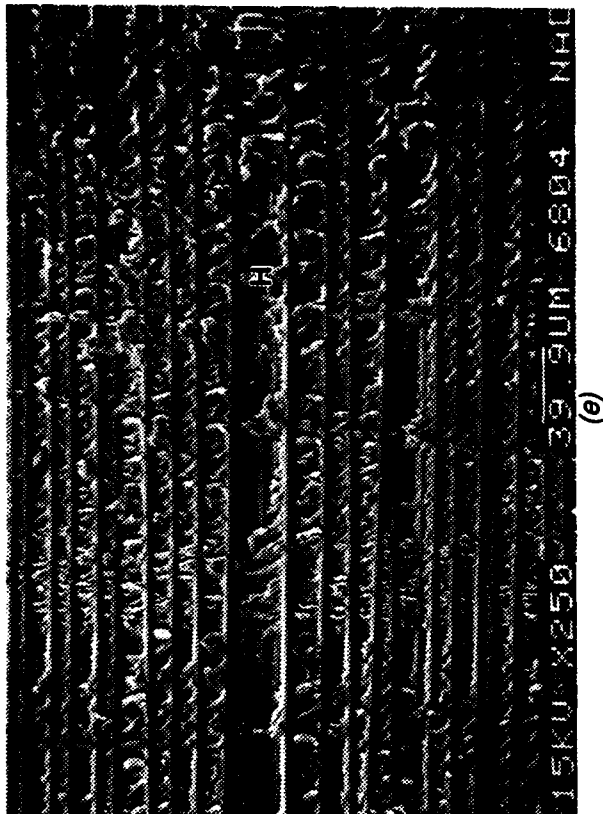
Optical and SEM Photographs of Bearing Failure in AS4/3501-6 Gr/Ep Bolted Joint
